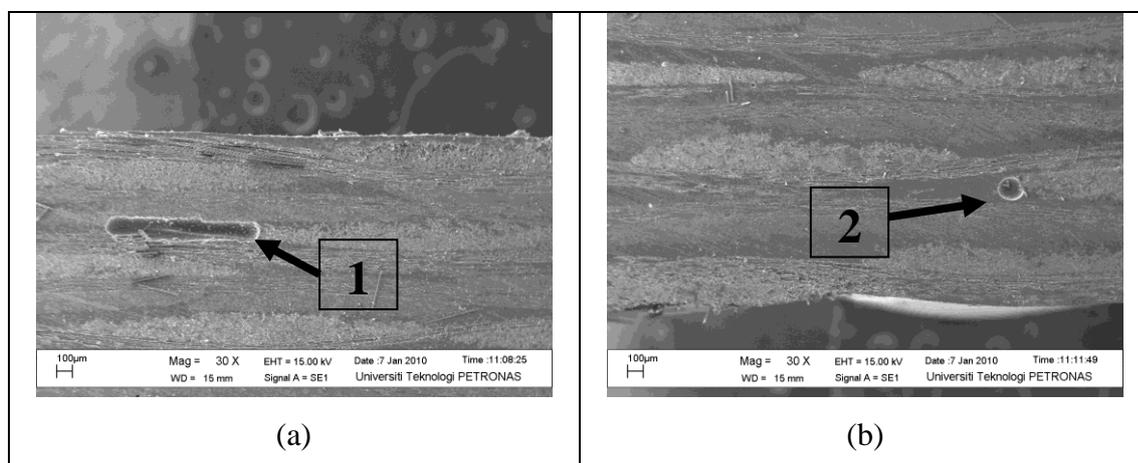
Surface microstructure of the drilled holes for 3 mm thickness GCRP (hybrid) fiber composites (a) Upper part: 1. Porosity (b) Lower part: 2. Porosity
